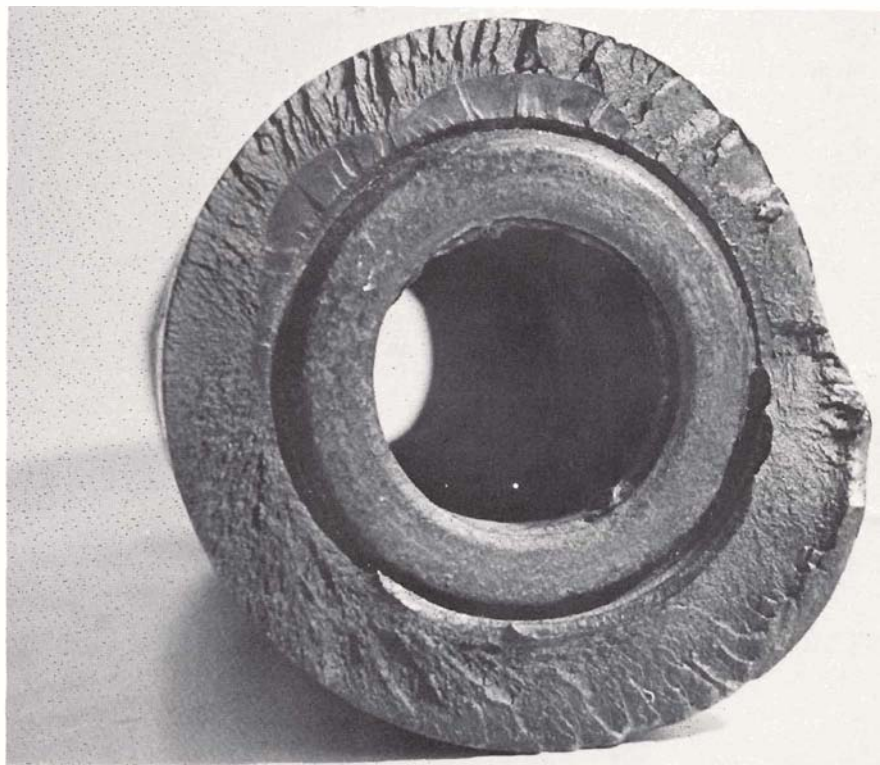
Drill collar fracture surface exposed following failure by fatigue.
